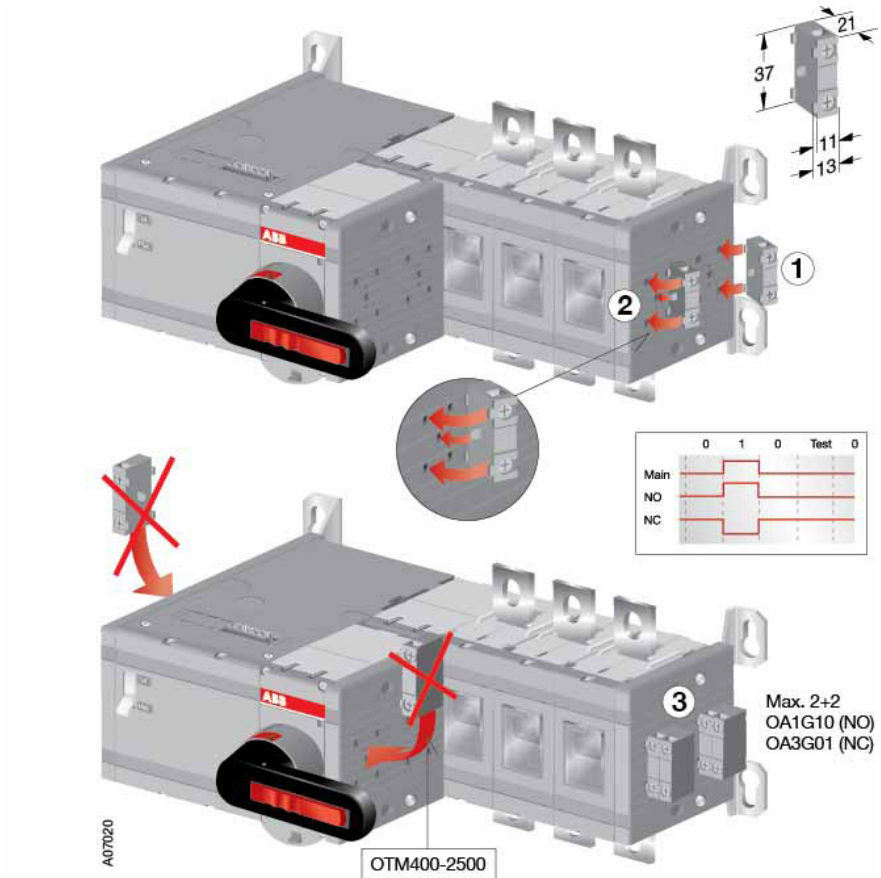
Mounting of auxiliary contacts, type OA_ on the right side of the switch-disconnector
